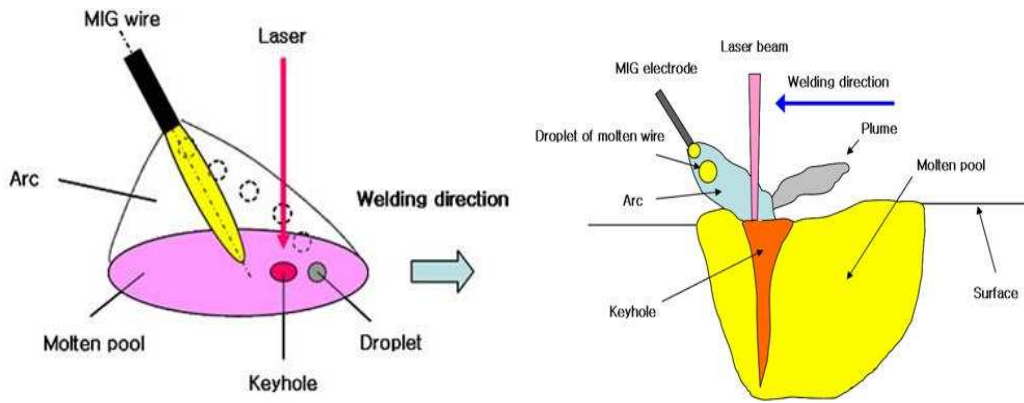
3 Schematic of Hybrid welding process
